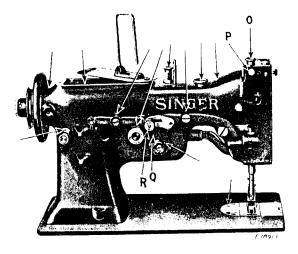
Back View of Machine, Showing Oiling Points also Adjustments on the Machine
